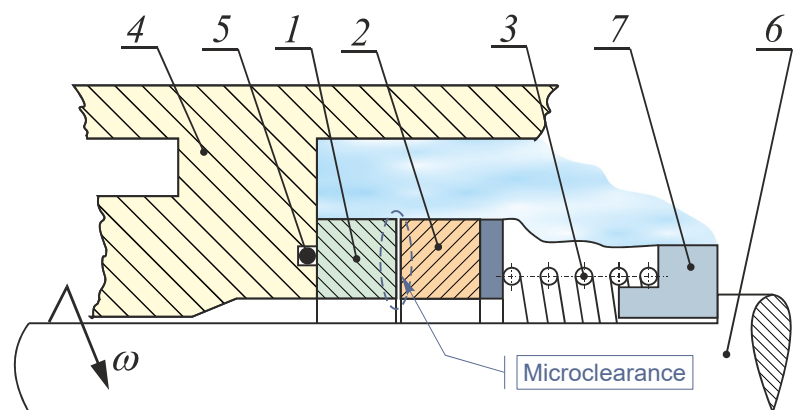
Non-contacting face seal: 1—stator, 2—rotor, 3—spring, 4—housing, 5—O-ring, 6—shaft, 7—steady pin.
